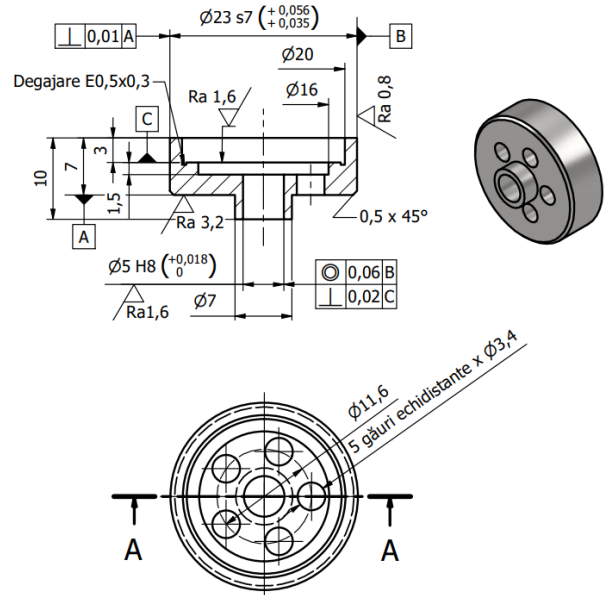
Detail drawing of the Anti-Reverse Valve Seat Piece
